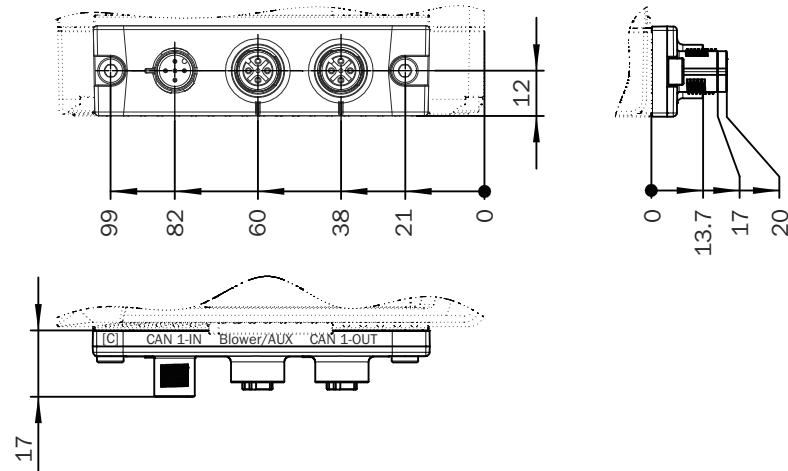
Dimensions of cloning plug C (M12), all dimensions in mm
